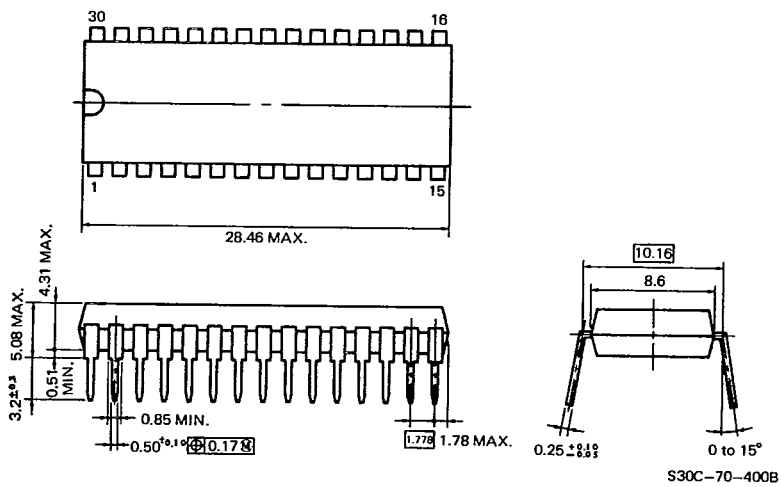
30-pin Plastic Shrink DIP (400 mil) Package Dimensions (Unit : mm)
